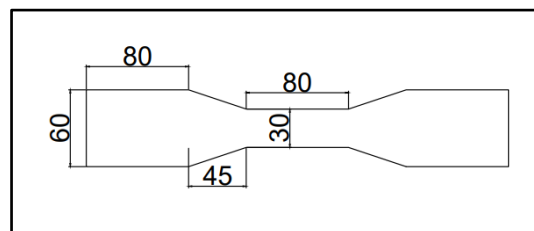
Dimensions of the tensile test specimen (all dimensions are in mm).
